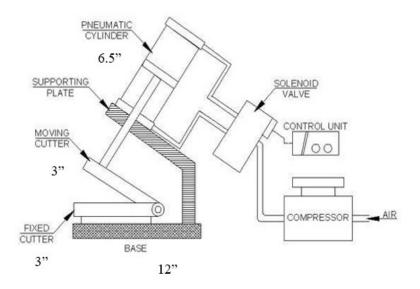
Diagram of Pneumatic Sheet Metal Cutting Machine
